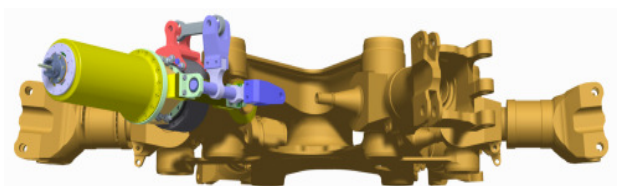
Rotor hub dummy of rotating component test stand for EMA gearbox qualification
